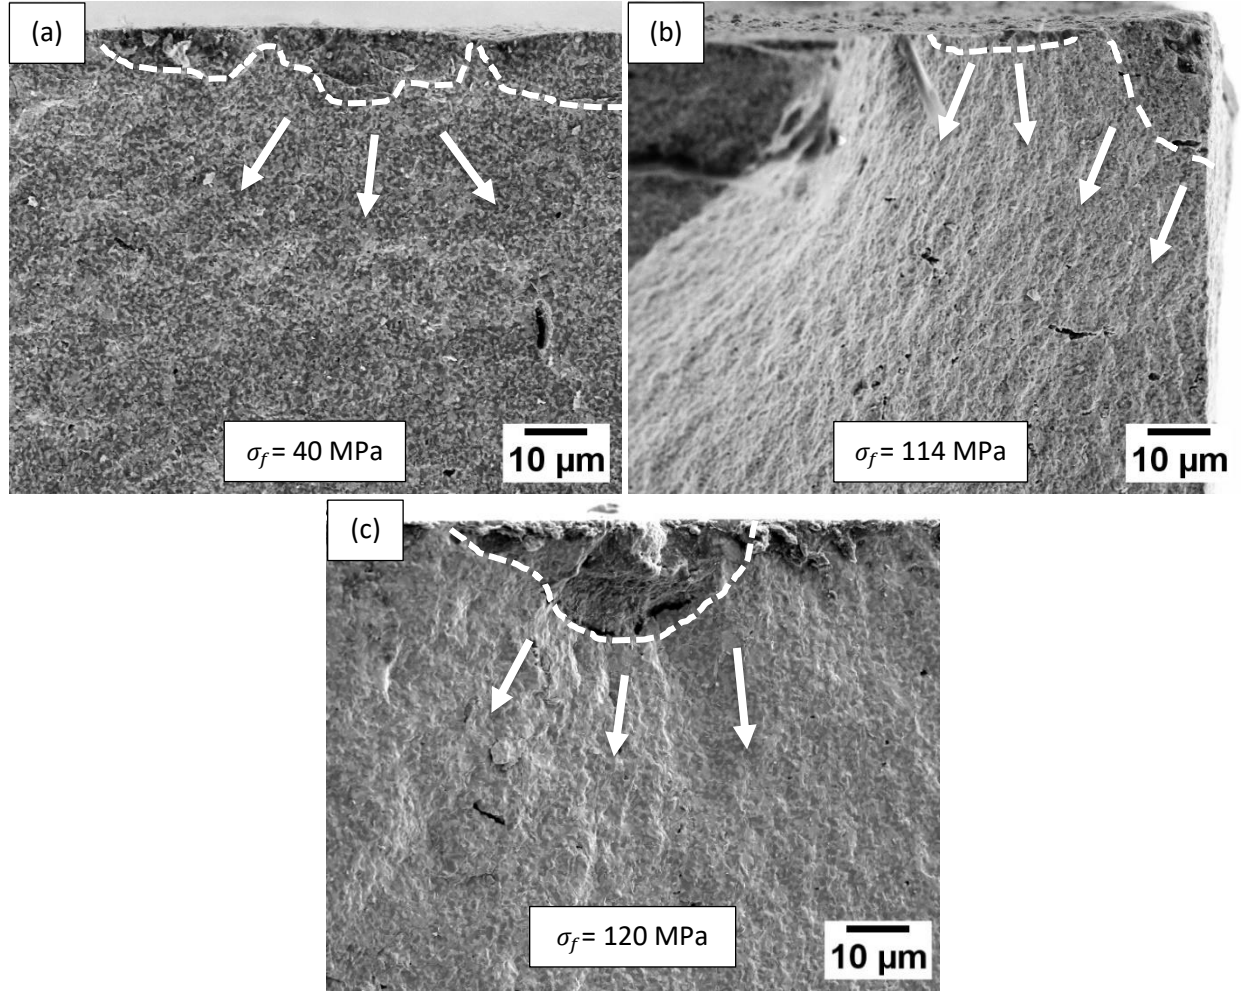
Fracture surfaces (SEM) of (a) 50CF, (b) 75CF fractured at the as-sintered surfaces, and (c) 50CF fractured at the deep sub-surface. Samples exhibiting the lowest fracture stresses are shown. The dashed lines represent the likely boundaries of the fracture origins. The fracture lines are indicated by the arrows.
